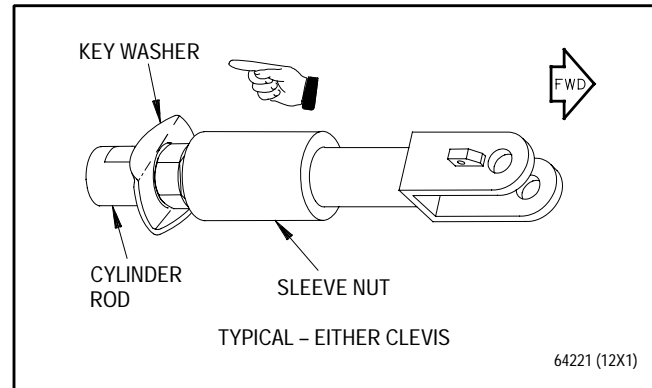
Compressor Inlet Variable Vane System - Rigging (Sheet 6 of 6)
